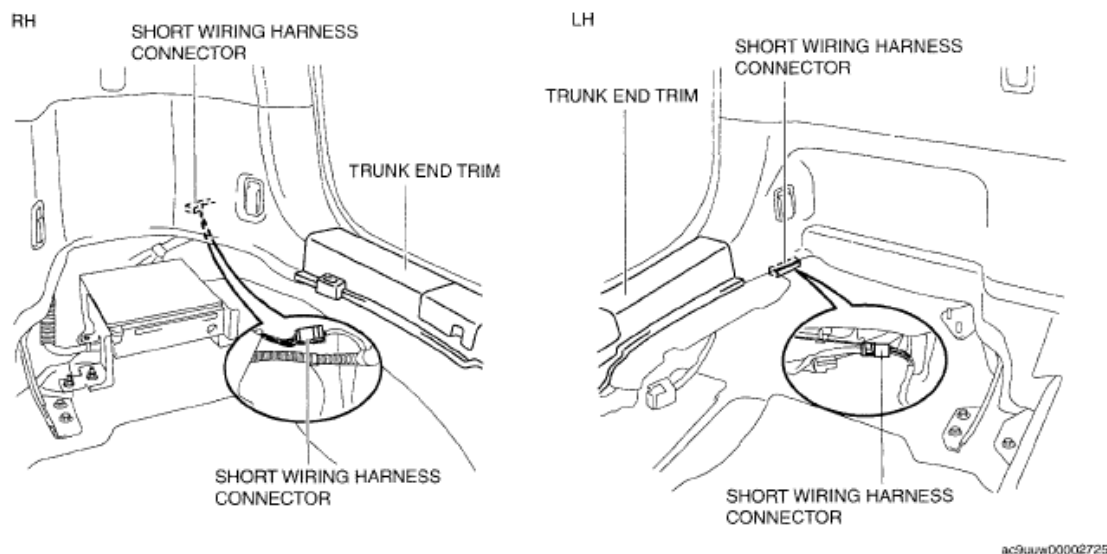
Identifying Trunk End Trim & BSM Control Module Short Wiring Harness Connector
